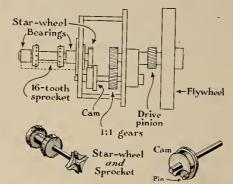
Geneva movement, assembled in its oil-well case, and with its star-wheel and cam shown separately. The design here pictured is the one in which the flywheel, instead of being mounted directly on the cam-shaft, is geared to it through two small 1:1 gears, and thus lined up with the intermittent-sprocket-star-wheel shaft.
